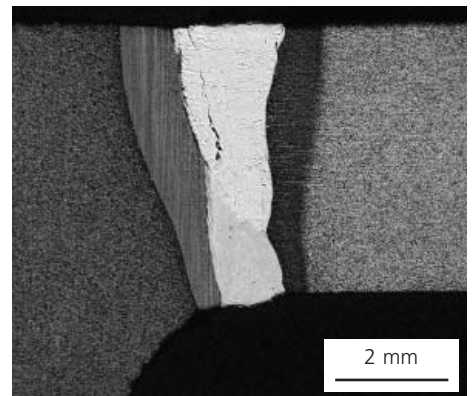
Polished cross section through a cracked weld seam of a disk-shaft test component after torsion-axial loading
